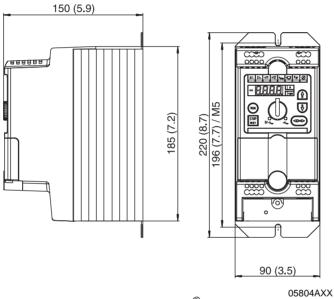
Dimensions, MOVITRAC[®] 07 size 0S
